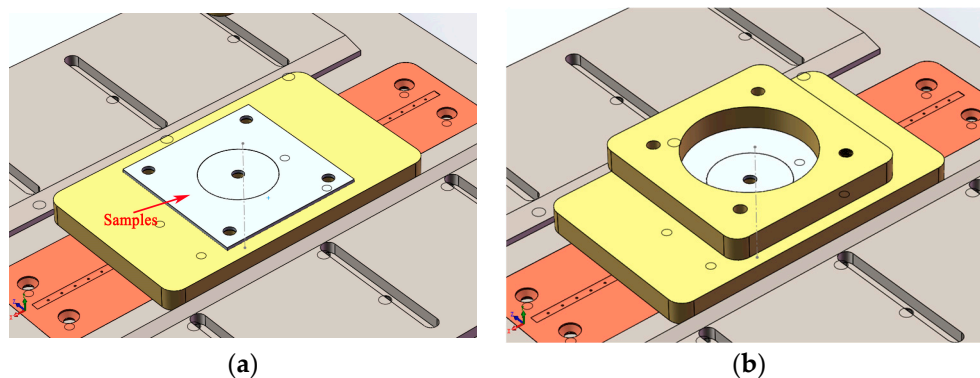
A sketch diagram of the circular-patch welding test instruments. (a) Samples (b) Test instruments with fastening bolts.
